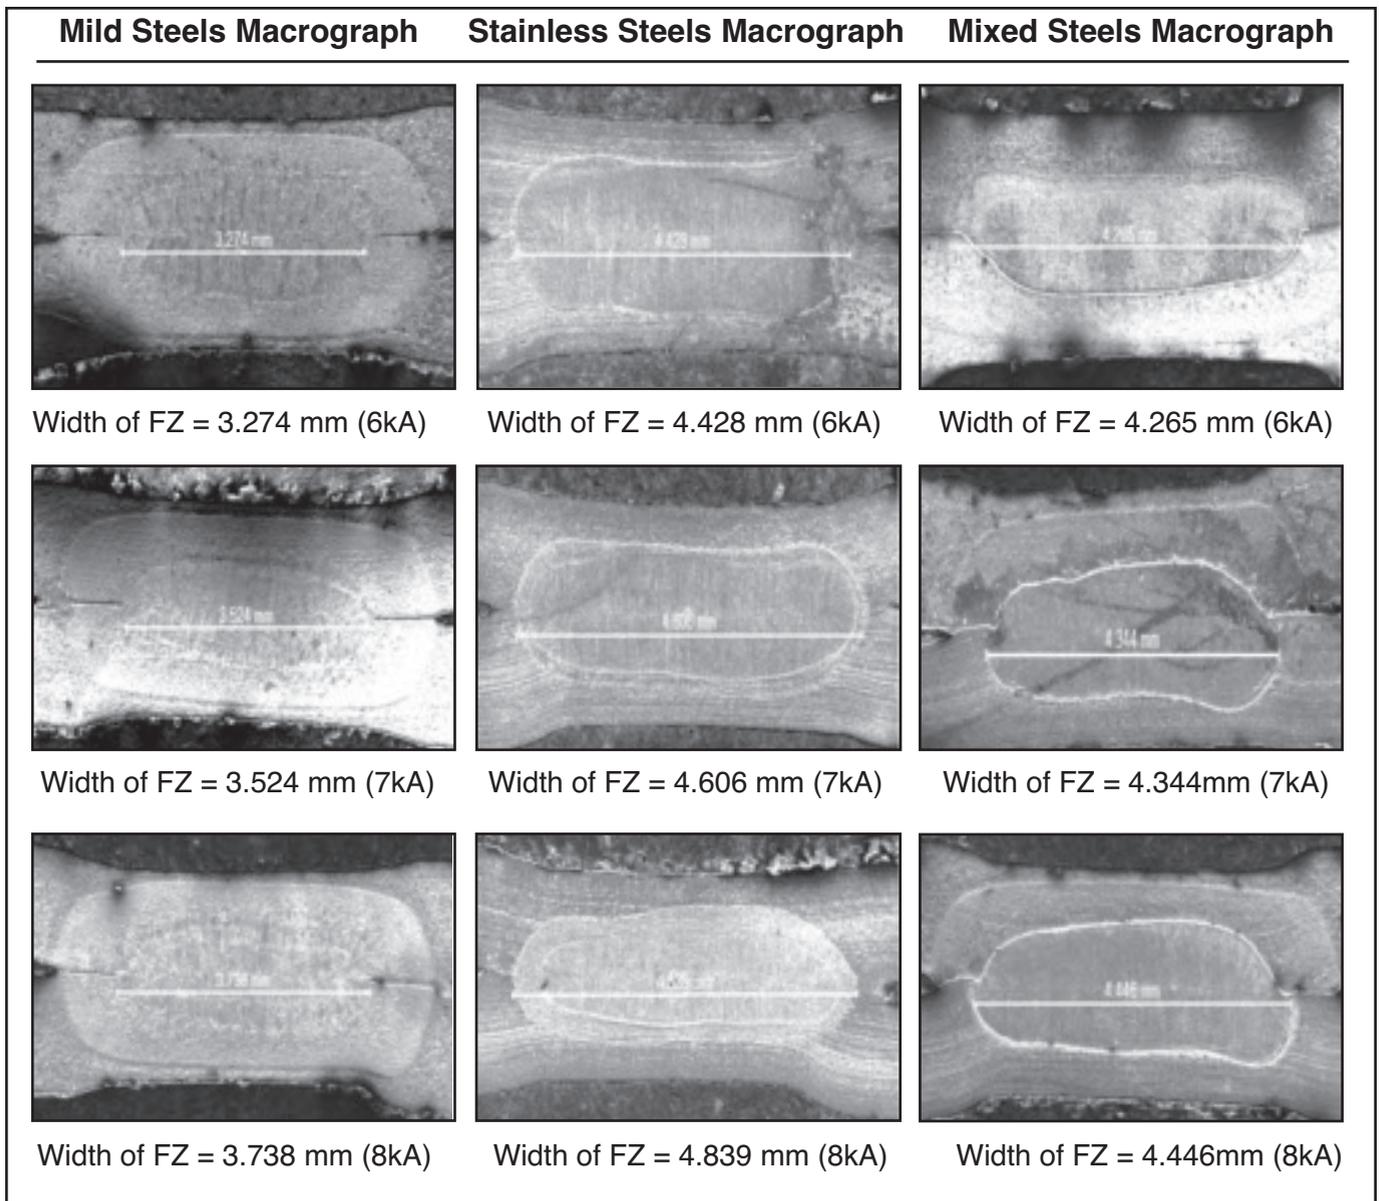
Nugget cross section of mild, stainless, and dissimilar steels.
